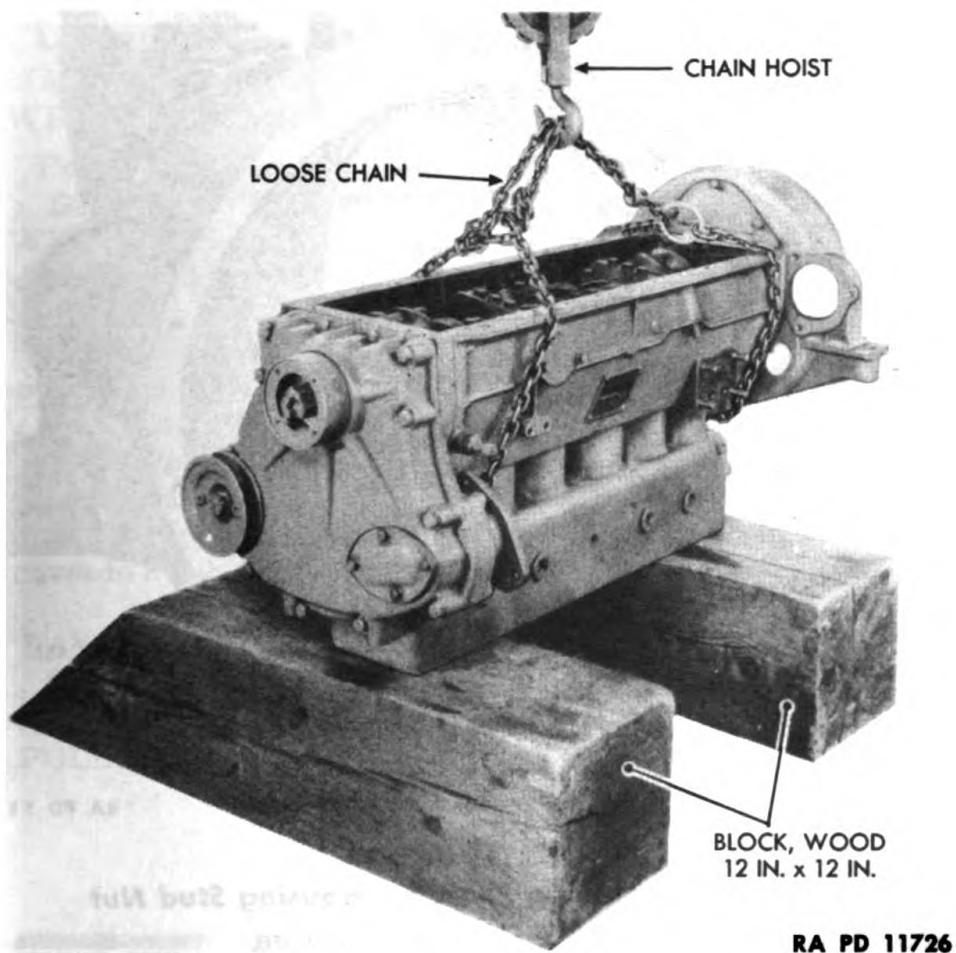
Position of Engine for Removal of Chain Case, Crankshaft and Camshaft
